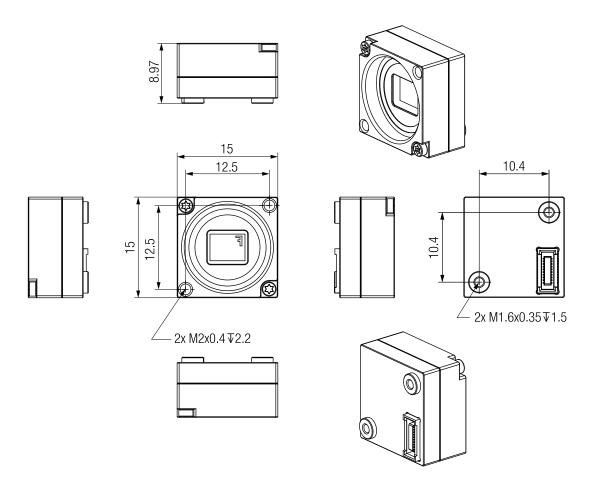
Dimensional drawings of MU196xR-ON and MU050xR-SY
